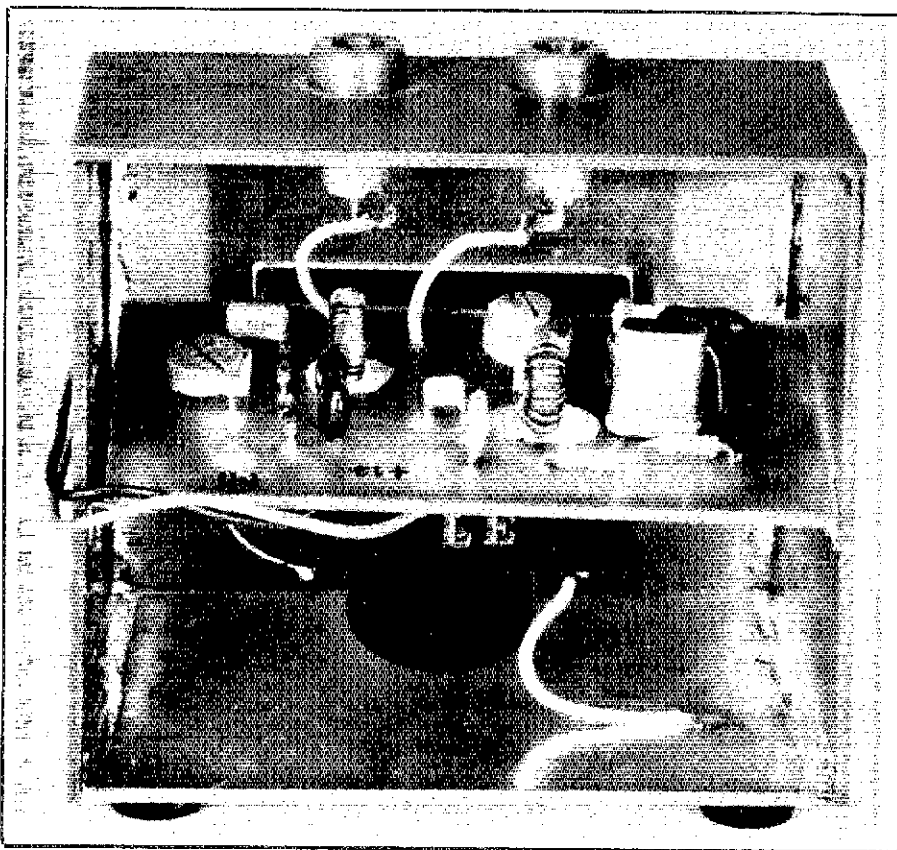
Interior view of the assembled tester. The case is made from sections of PC board that are soldered together.
